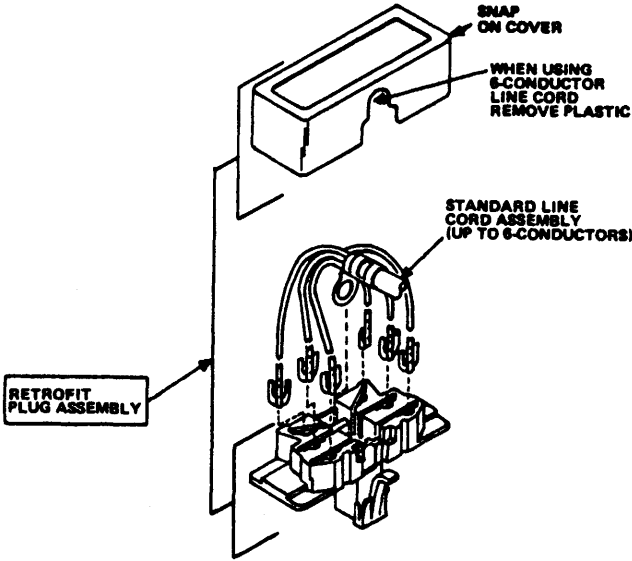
Retrofit Plug Assembly (HD-570032-A or -B).
